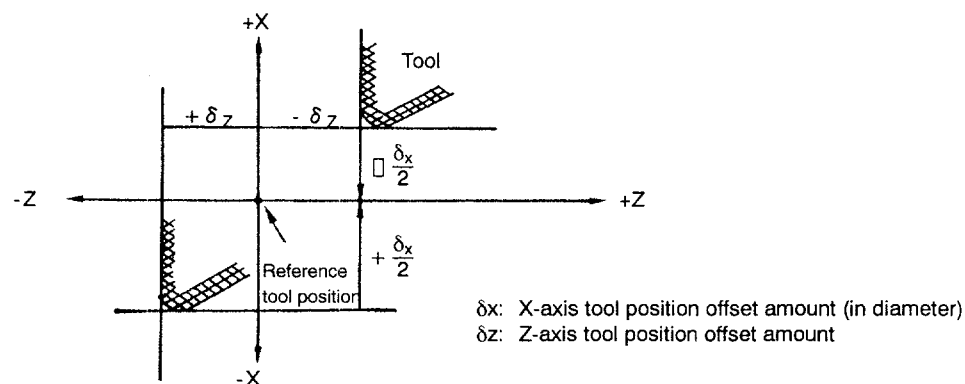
Signs Used in Tool Position Offset Amounts
